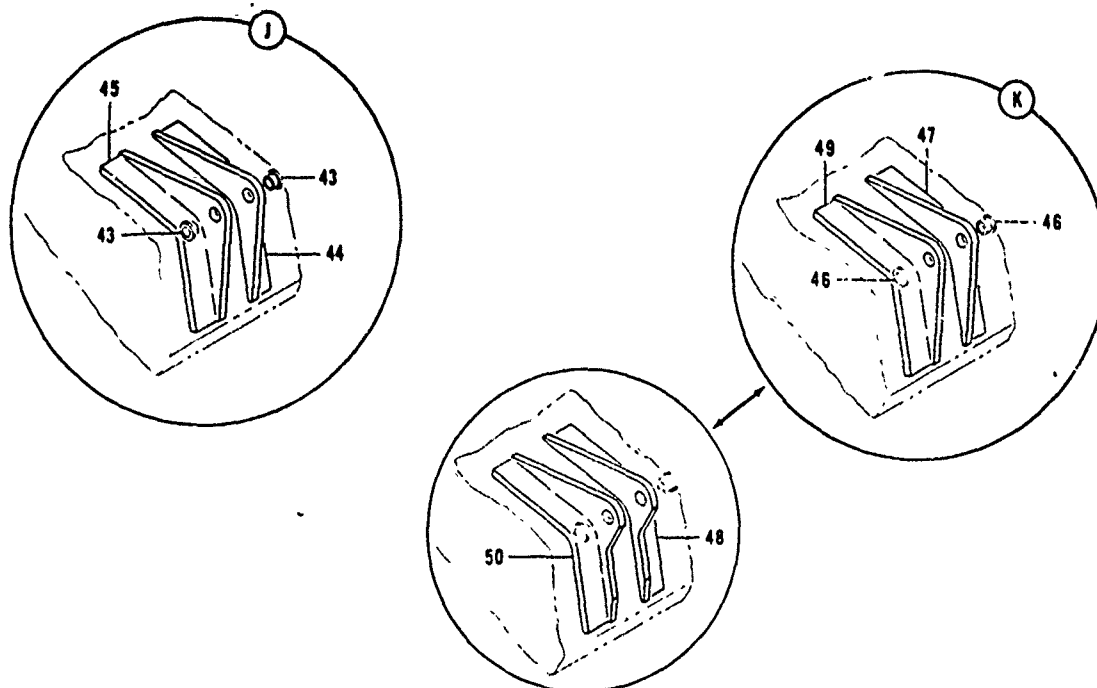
Main Gear Inboard Door Assemblies (Sheet 3 of 3)
